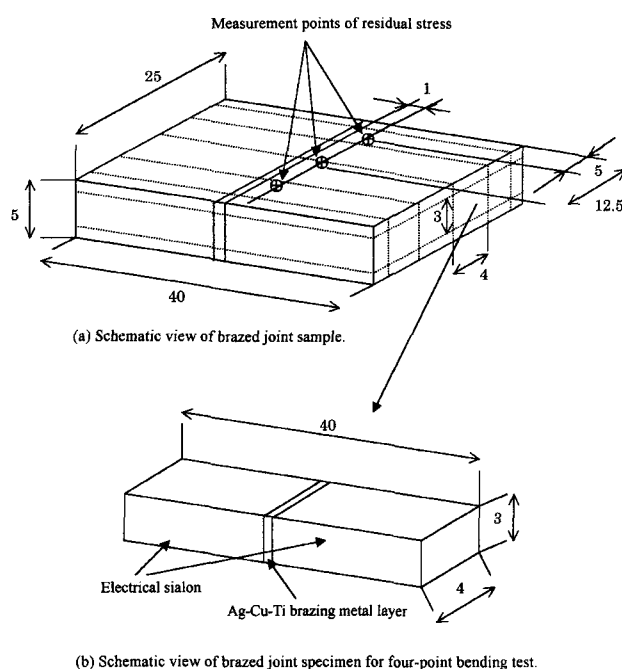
Schematic view of brazed joint sample and brazed joint specimen for four-point bending test.
